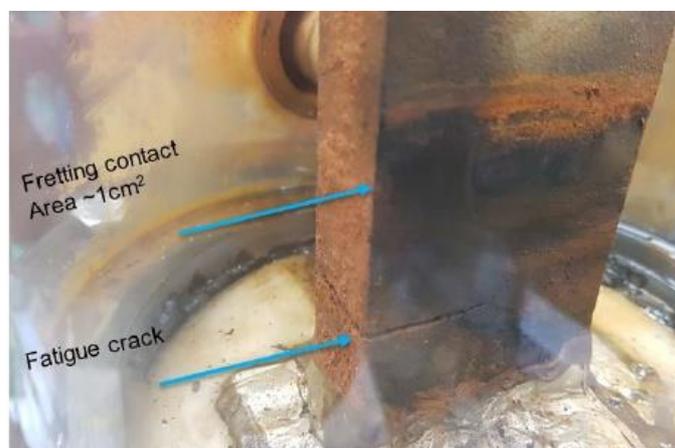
| EXAMPLE OF SPECIMEN FRACTURE
